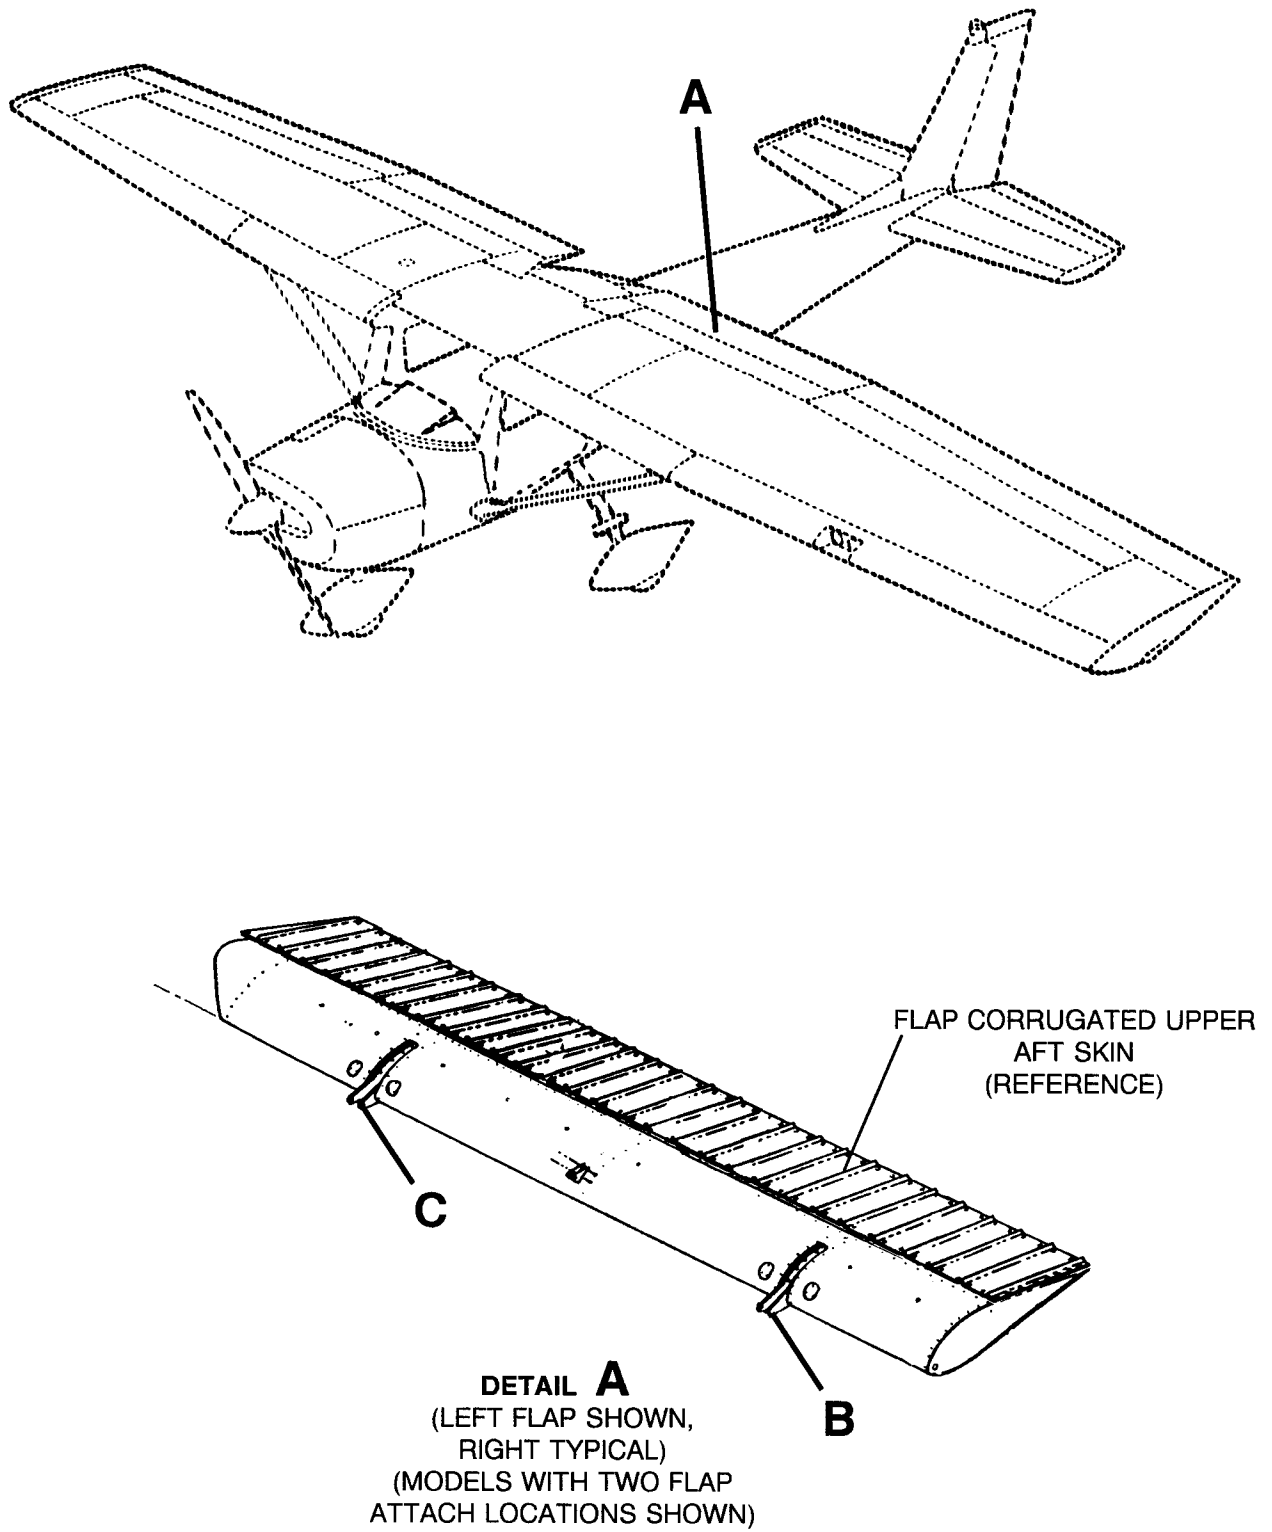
Flap Support Rib Assembly and Roller Bearing Replacement (Sheet 1 of 9)
